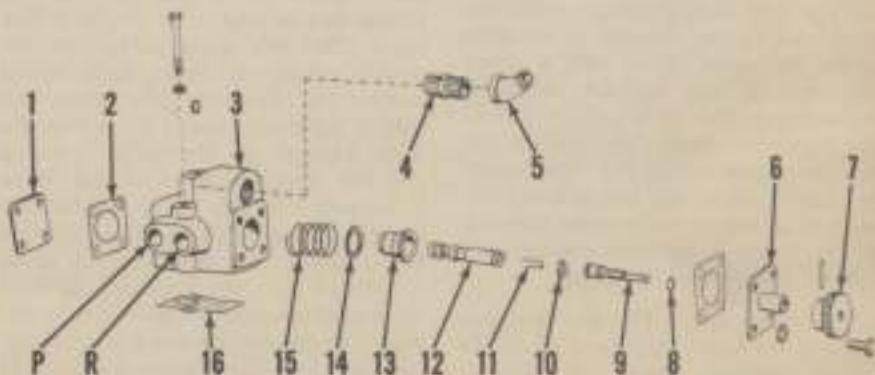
Expanded view of transport valve available as optional equipment. See paragraph 251.
